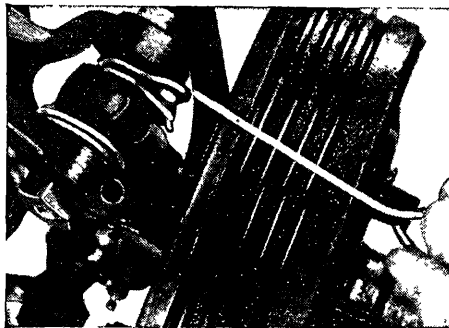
Positioning seals at upper pivot pin. 1939-48
